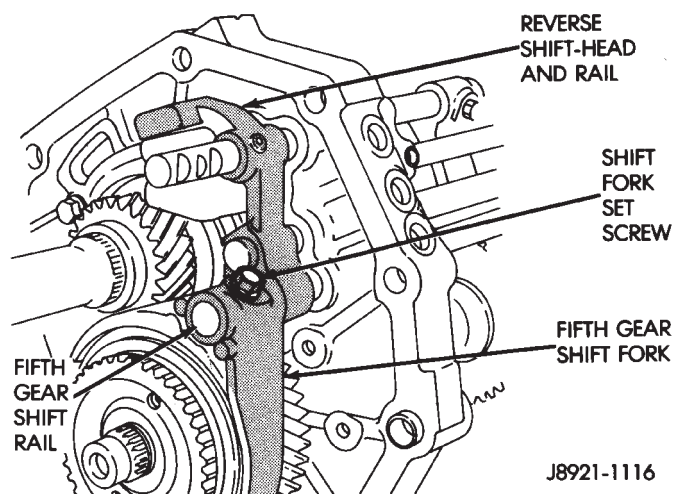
Install Fifth Gear Shift Fork Retainer Bolt
